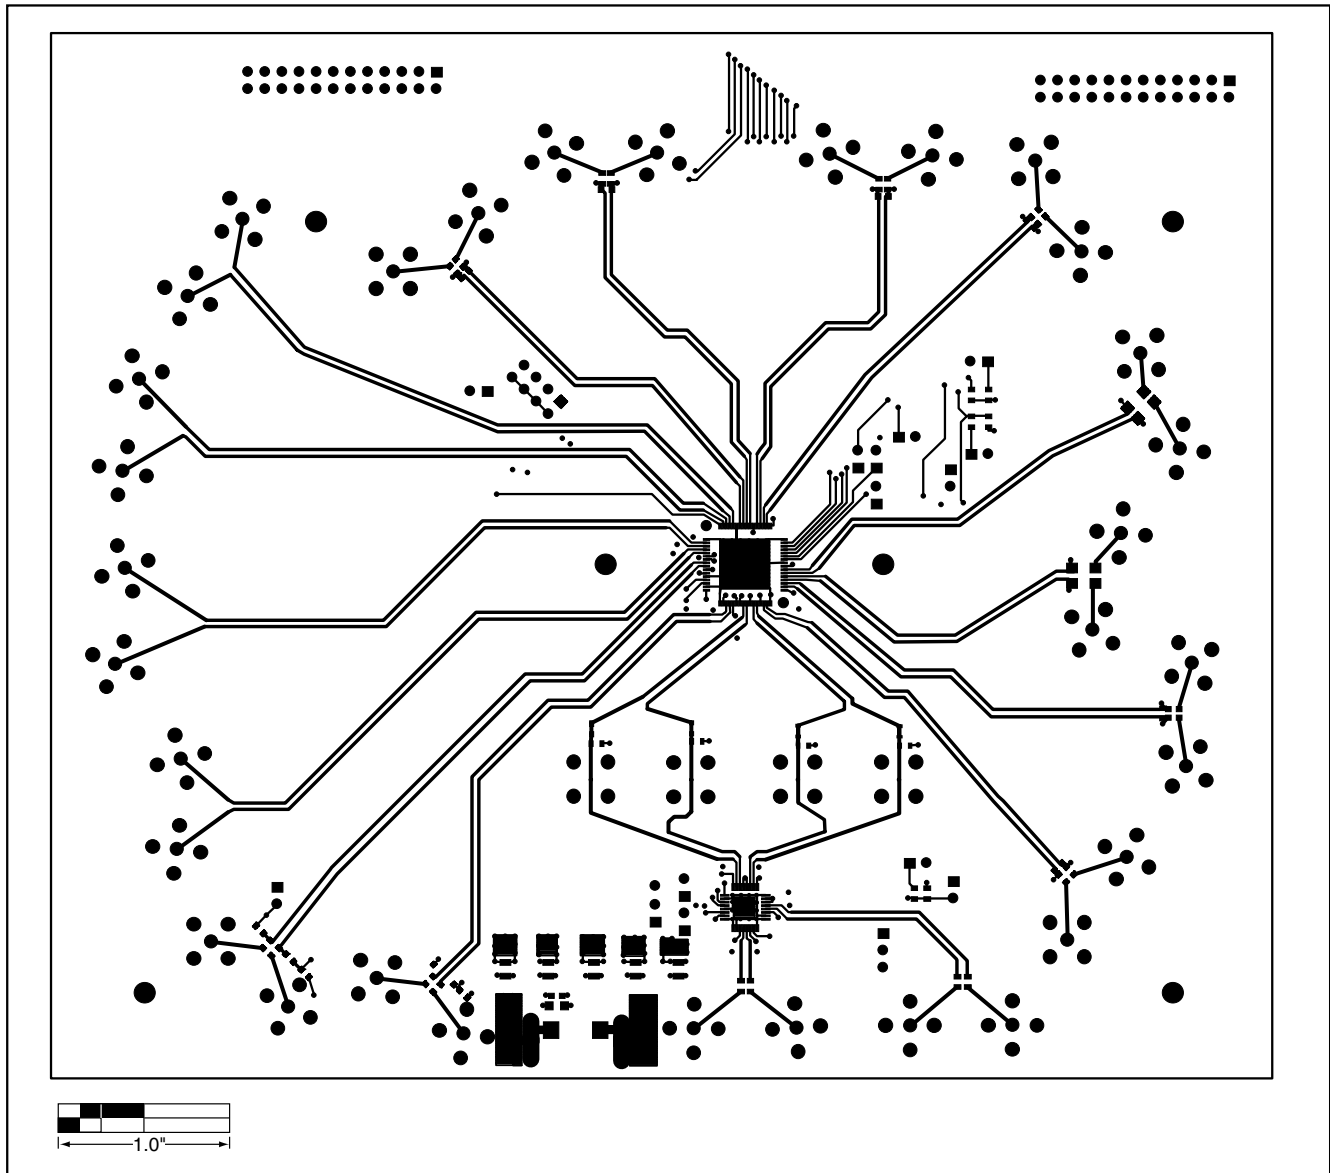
MAX3831/MAX3832 EV Kits PC Board Layout—Component Side
